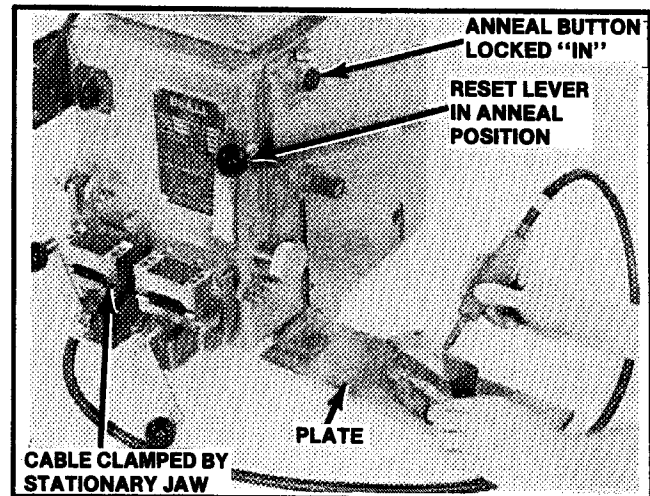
USING ETCHING PENCIL WITH PORTABLE WELDER.
